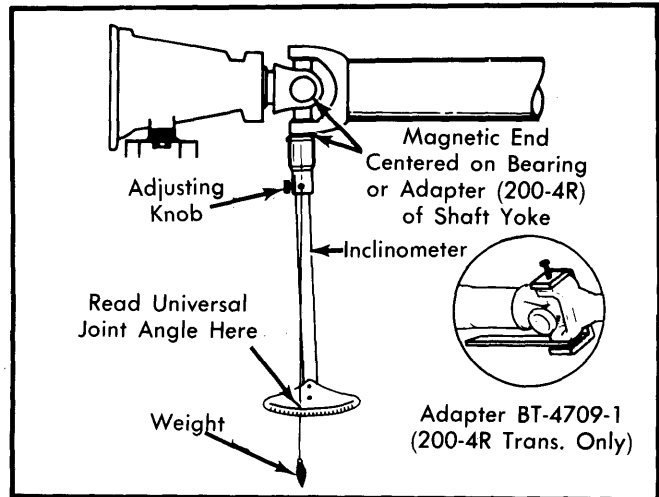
Checking Transmission Angle Using Inclinometer (BT - 6902)
